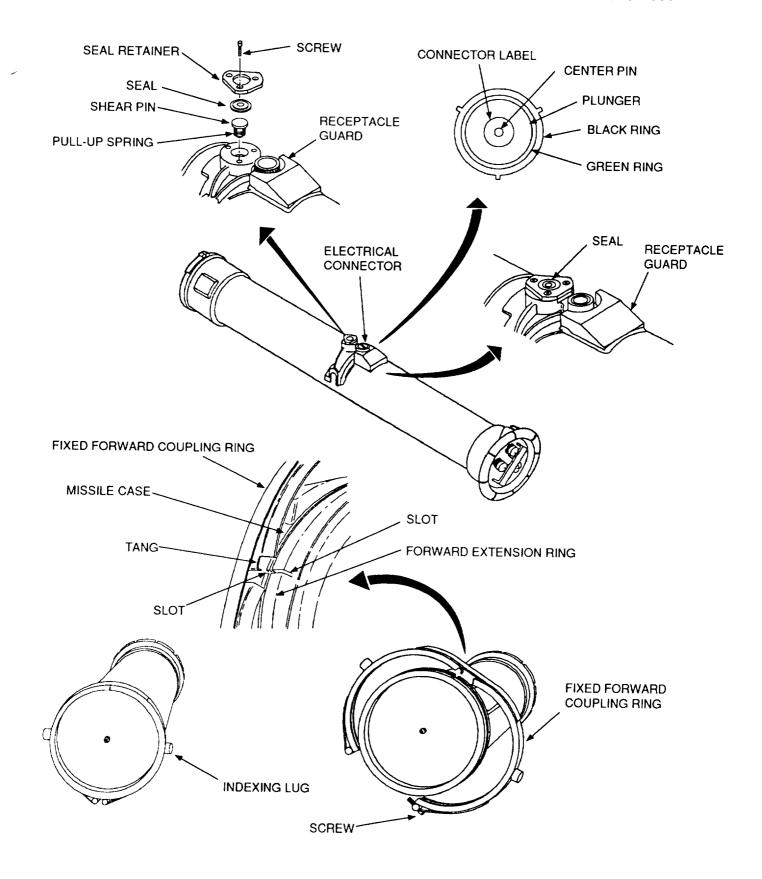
Missile Simulator Inspection Points (Sheet 1 of 2)
